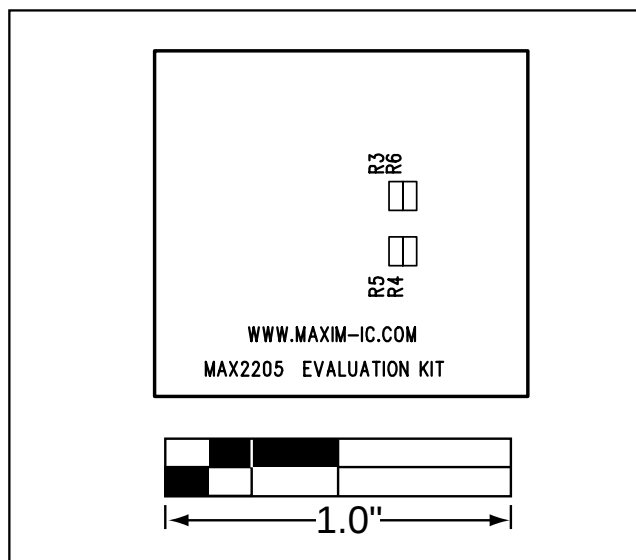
MAX2205 EV Kit Component Placement Guide—Bottom Silkscreen
